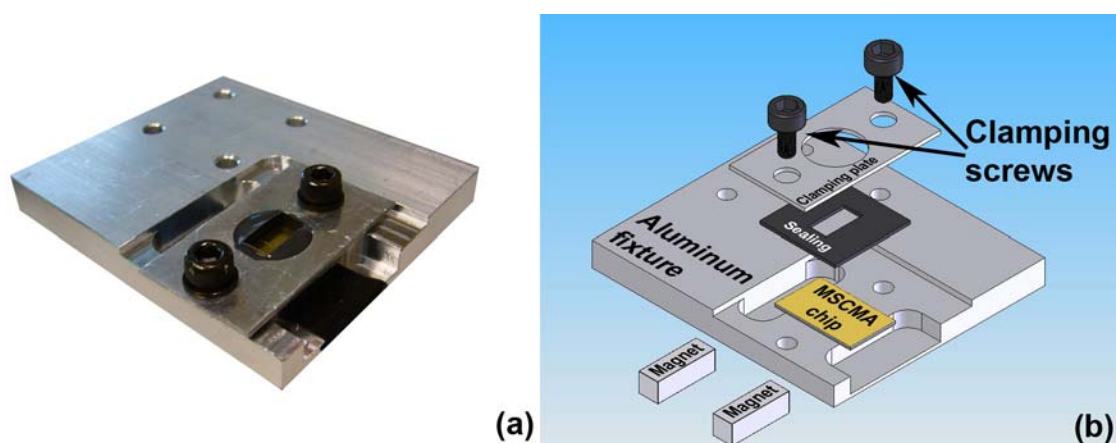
(a) The aluminium fixture MSCMA assembly, and (b) the 3D illustration of the same assembly.
